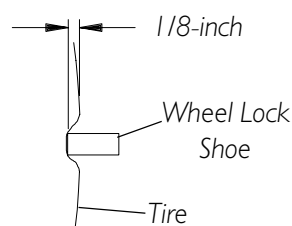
WHEEL LOCK ADJUSTMENT
